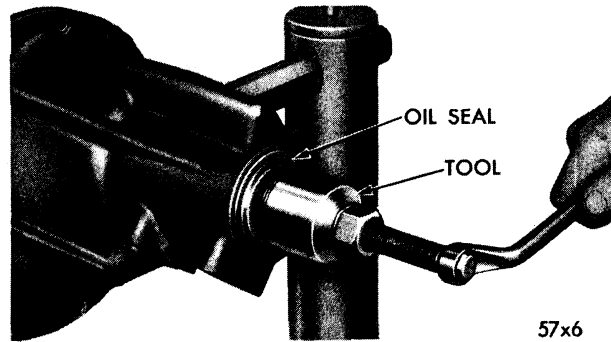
Removing Drive Pinion Bearing Oil Seal
